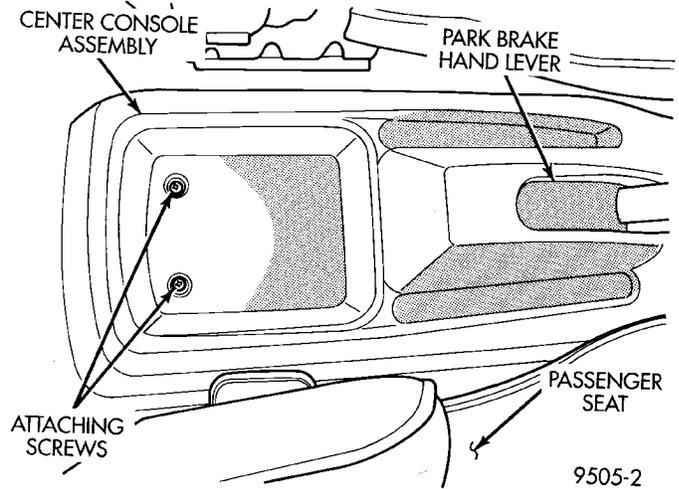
Attaching Screws At Rear Of Center Console W/O Arm Rest
